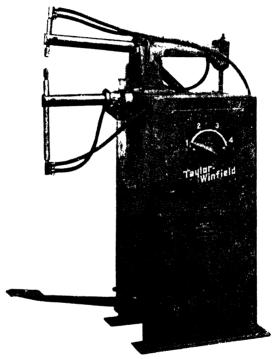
Typical spot welding machine: The electrodes are water cooled, the transformer is adjustable to four different heats and operating switch is located below the transformer and is operated by the vertical rod
